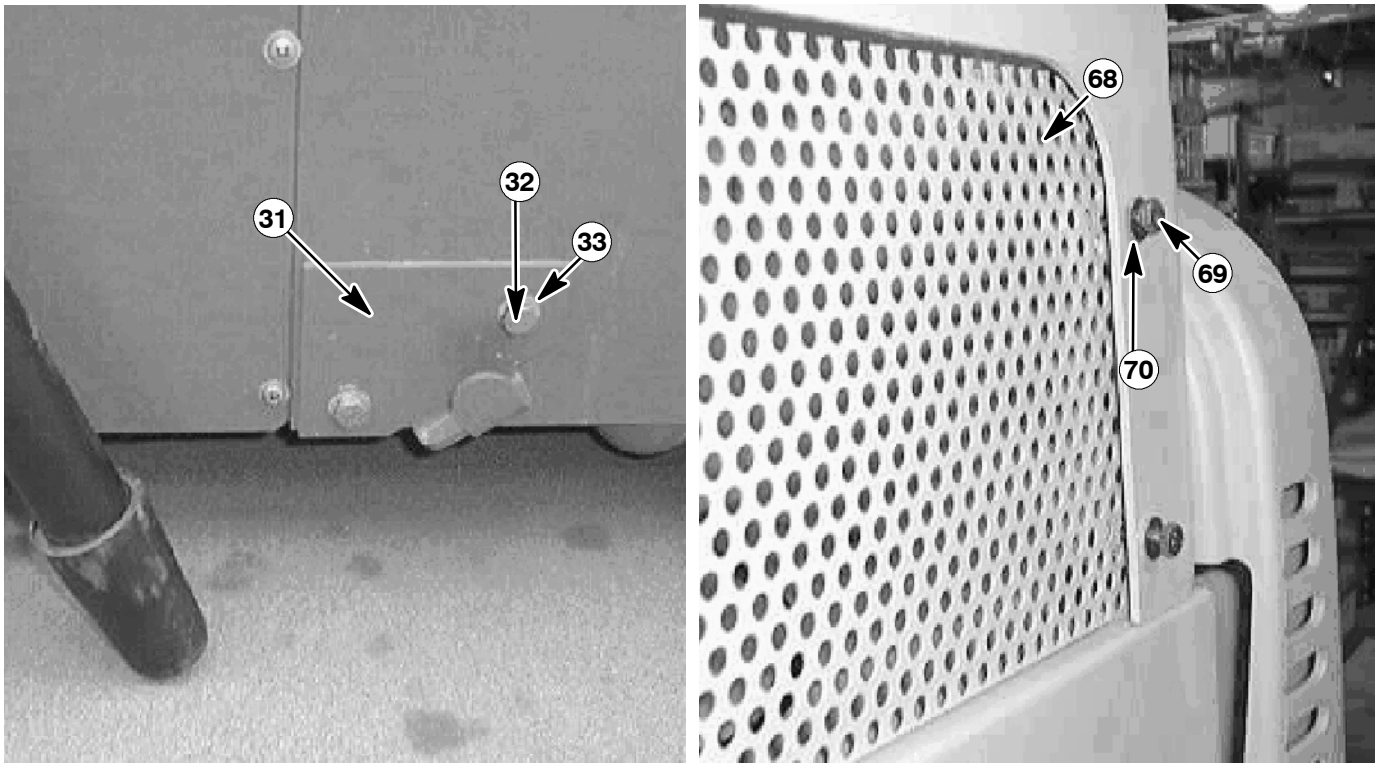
Gas Spring and Vacuum Bag Installation
